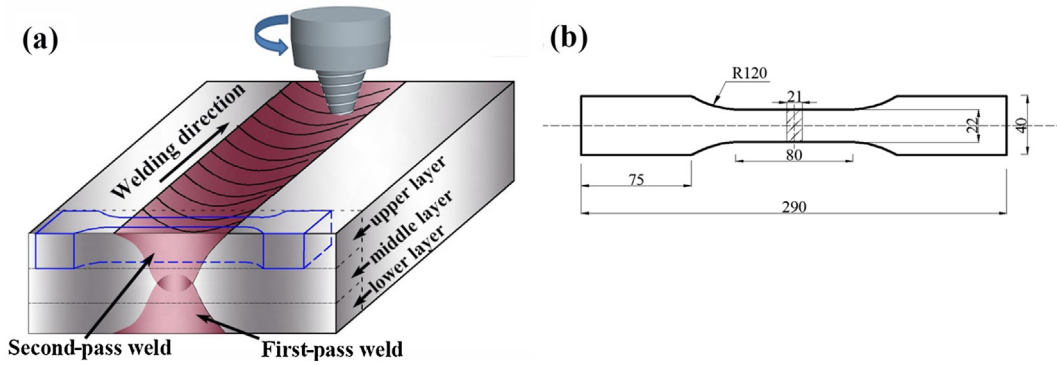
Schematic diagrams of (a) sampling position, (b) tensile and fatigue specimens.
